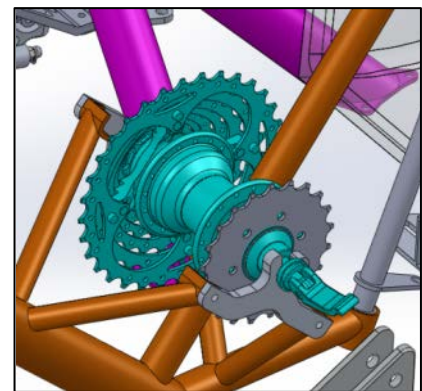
Mid-Drive Setup with disc brake bolt pattern mounted step-up gear.
